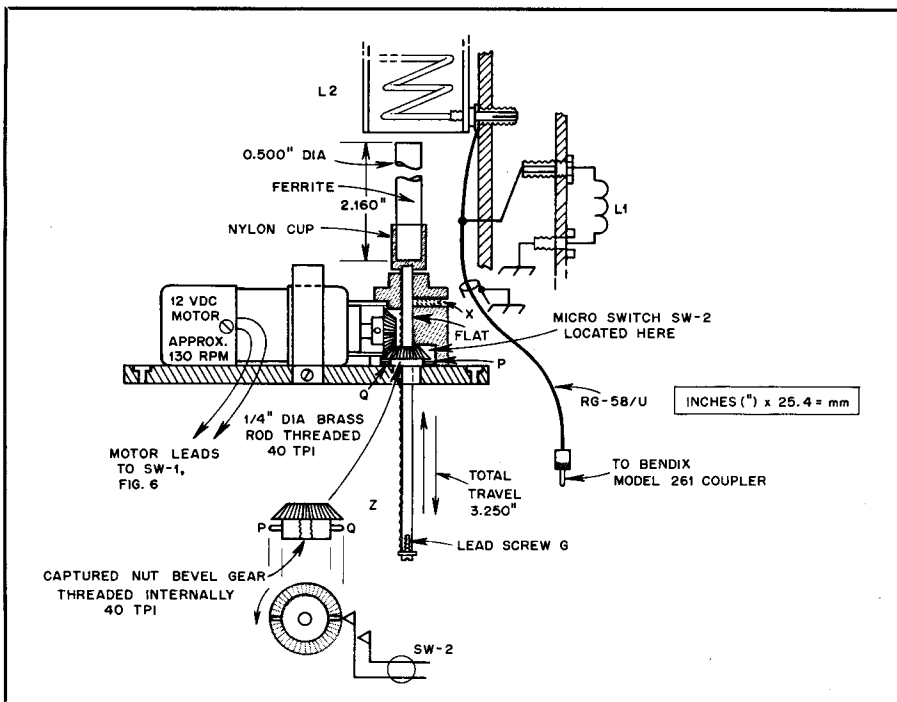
The remote variable-inductor drive assembly. Threaded drive rod G has a milled flat over its whole length; the rod is prevented from rotating by means of a set screw positioned against this flat at X. The hole in bevel gear Z is tapped for 1/4-40 threads per inch and mates with drive rod G. The motor-driven bevel gear drives the "captured nut" bevel gear Z, raising or lowering the ferrite rod inside L2. Projections P and Q on bevel gear Z activate switch S2 (see Fig. 6) twice per revolution. S2 will be activated for each 0.0125 in. (0.3 mm) of up or down travel of lead screw G. Two-conductor shielded cable is routed from S2 to the control center (see Fig. 6).
